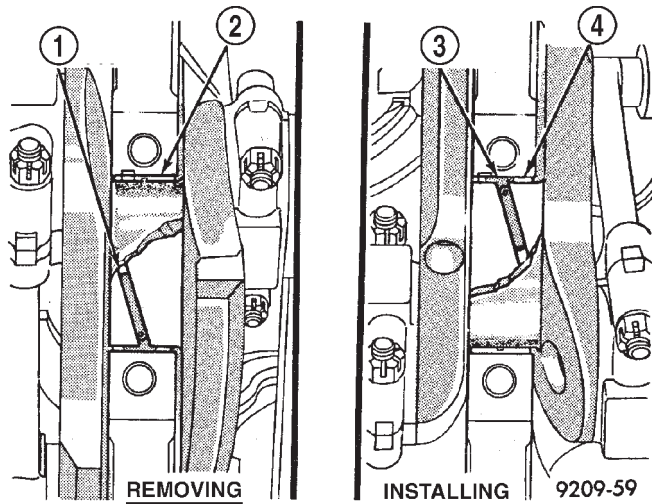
Upper Main Bearing Removal and Installation with Tool C-3059
